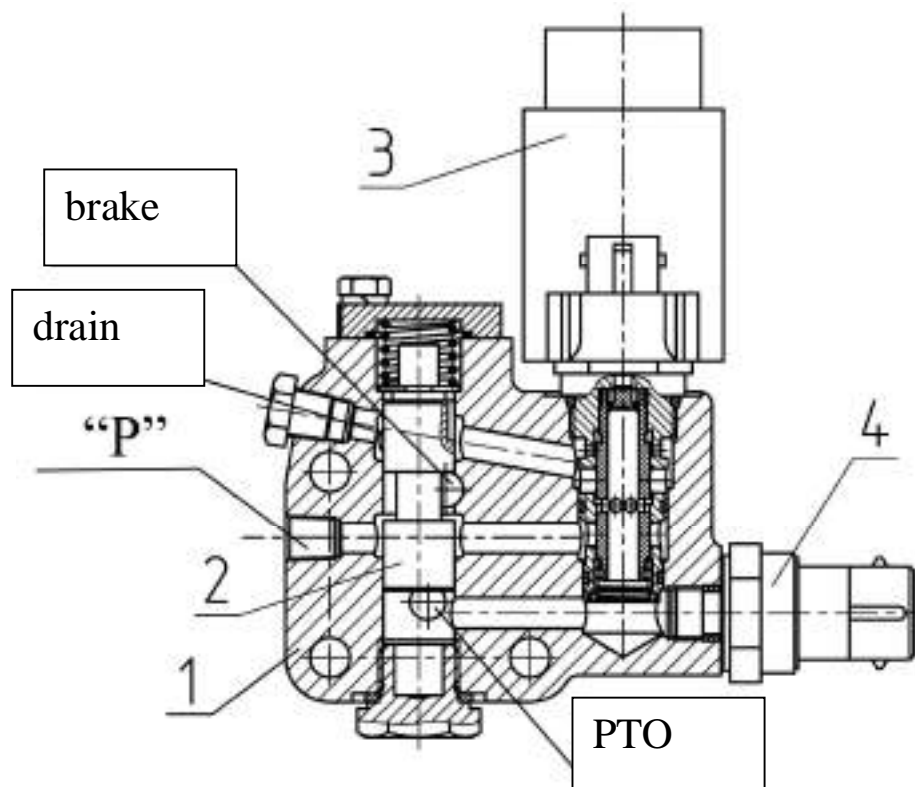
Electrohydraulic transmission hydraulic system distributor
